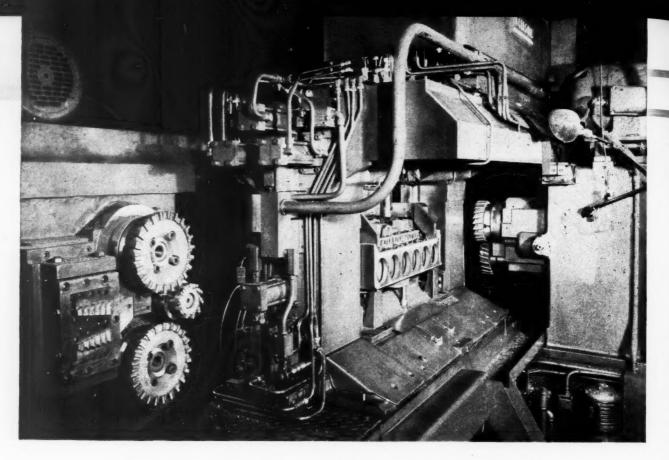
Rear view of the eight-spindle, two-station shuttle type milling machine seen in the heading illustration. The broach at the left finish-sizes a locating channel for the main bearing cap
